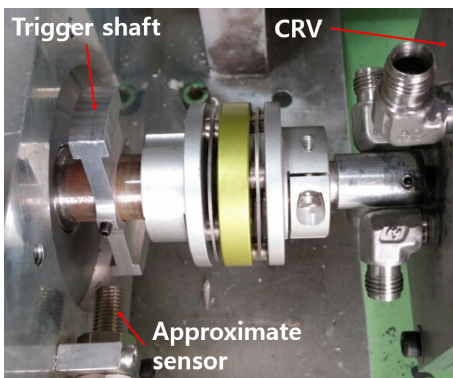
The picture of the parts between the CRV, trigger shaft and servo motor.
